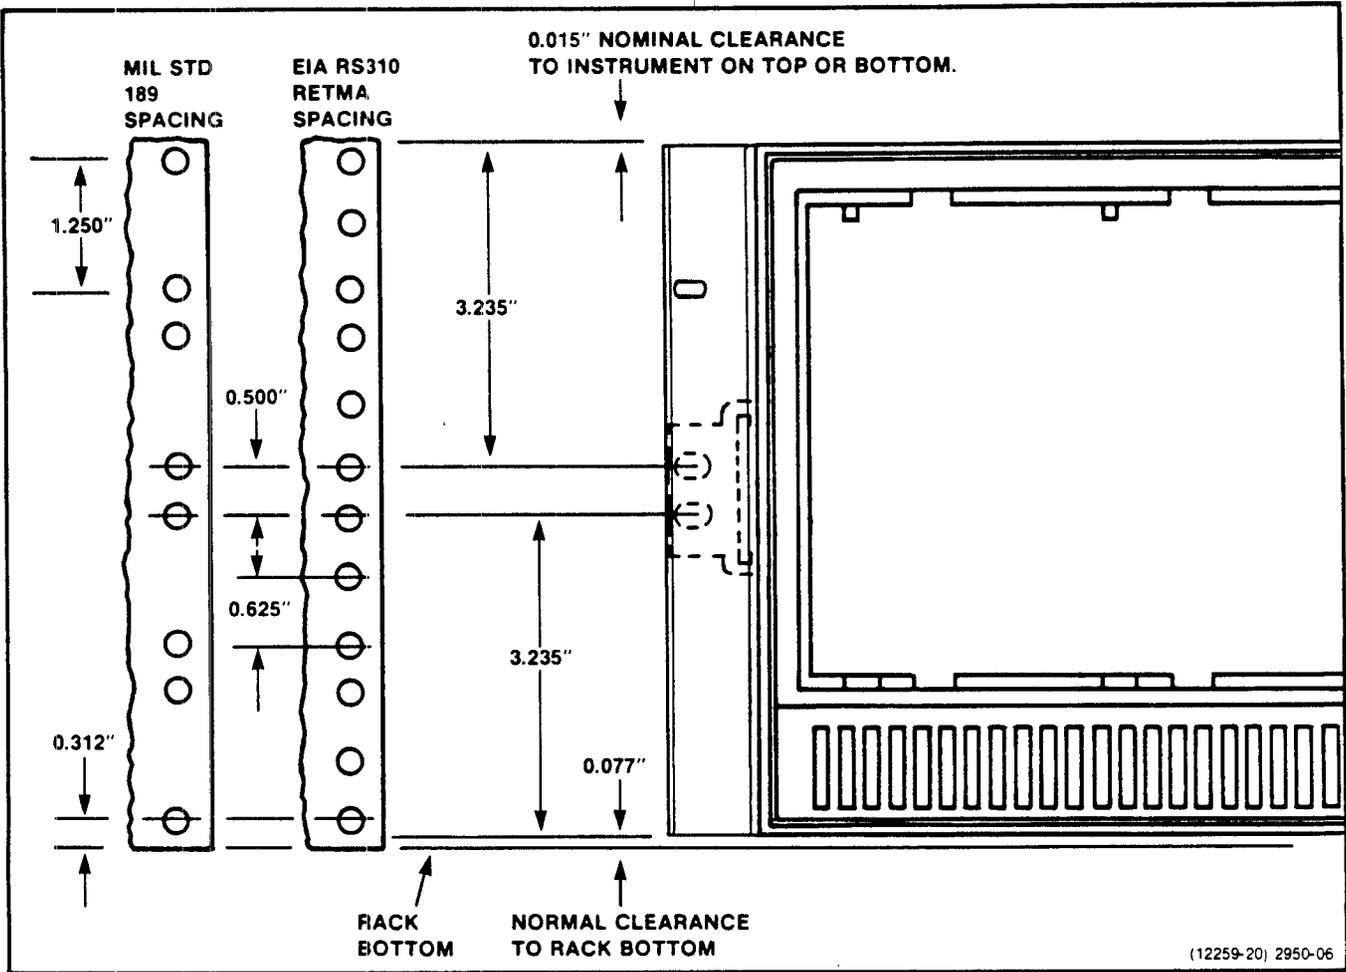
Dimensions and positioning of TM 506A, Option 10, in standard rack.
